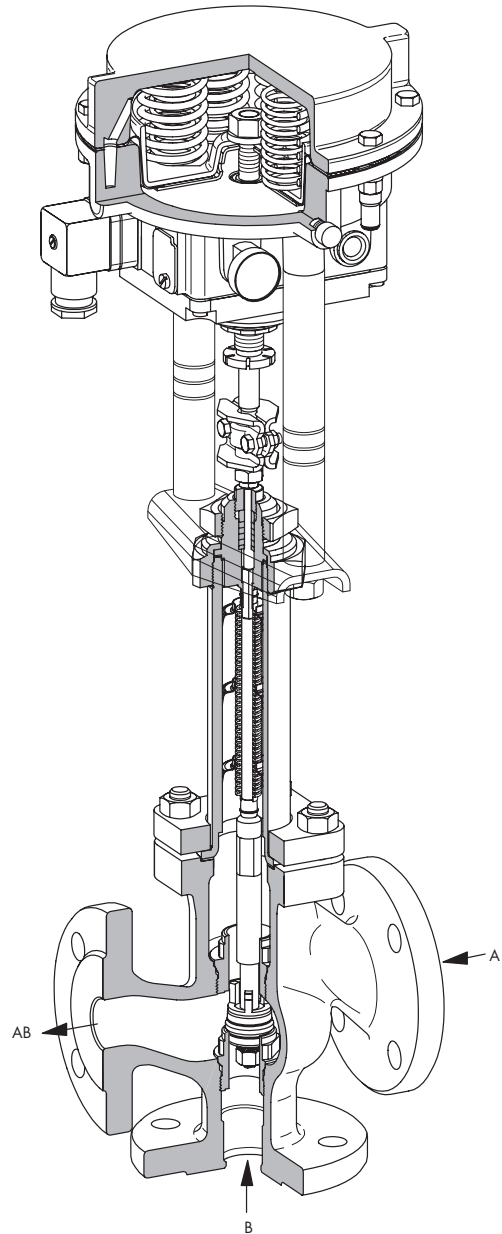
· Type 3535-IP Mixing Valve for Heat Transfer Oil, pneumatic actuator with integrated i/p positioner
